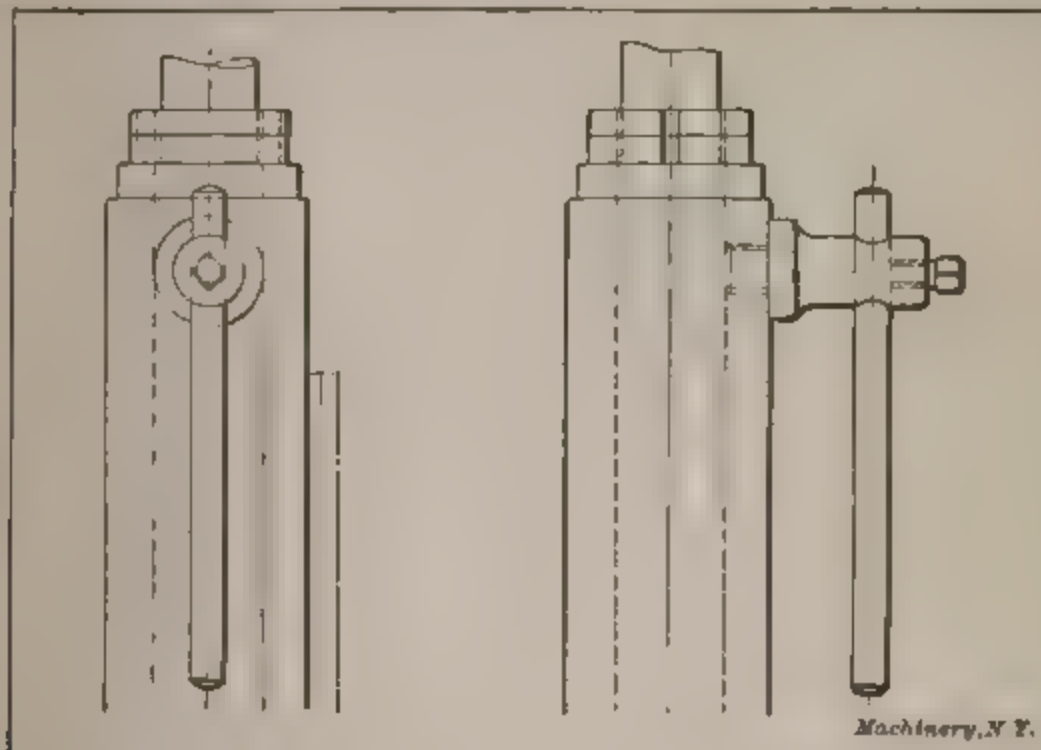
Trip Rod Fitted to Drill Press Sleeve
